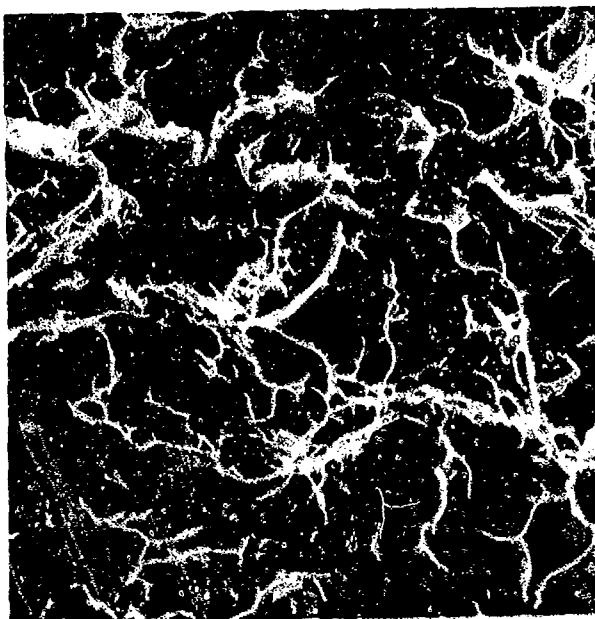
Failure of AX-110 weld Charpy specimen tested at -196°C by cleavage, 4000x.
